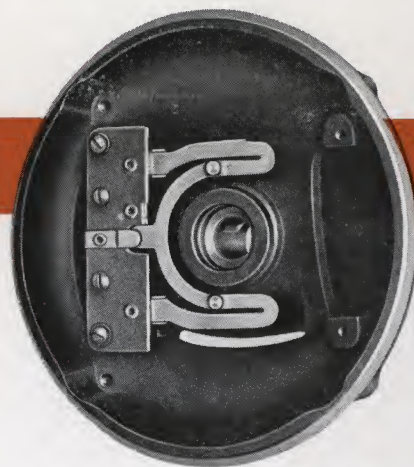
Illustrating 1/6 Horse Power end bracket with cut-out and non-pitting silver contacts.
